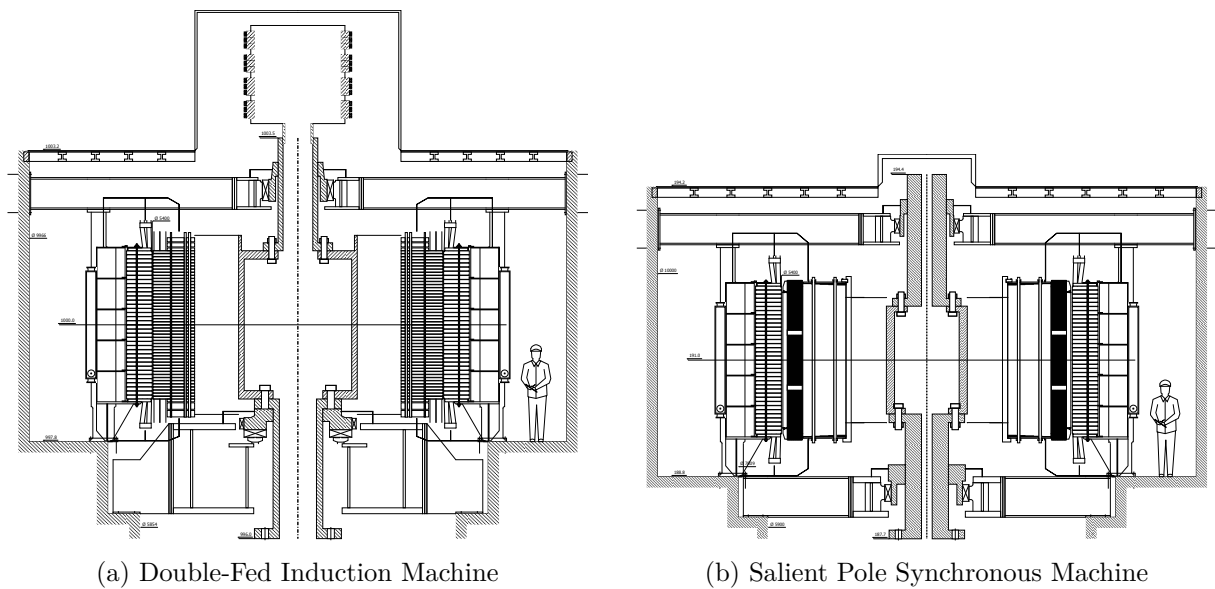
Longitudinal section of the two machines (from Alstom design tool)
